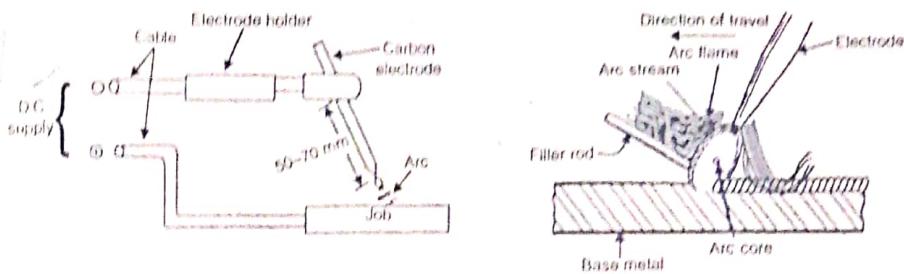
Principle of Carbon Arc Welding.
